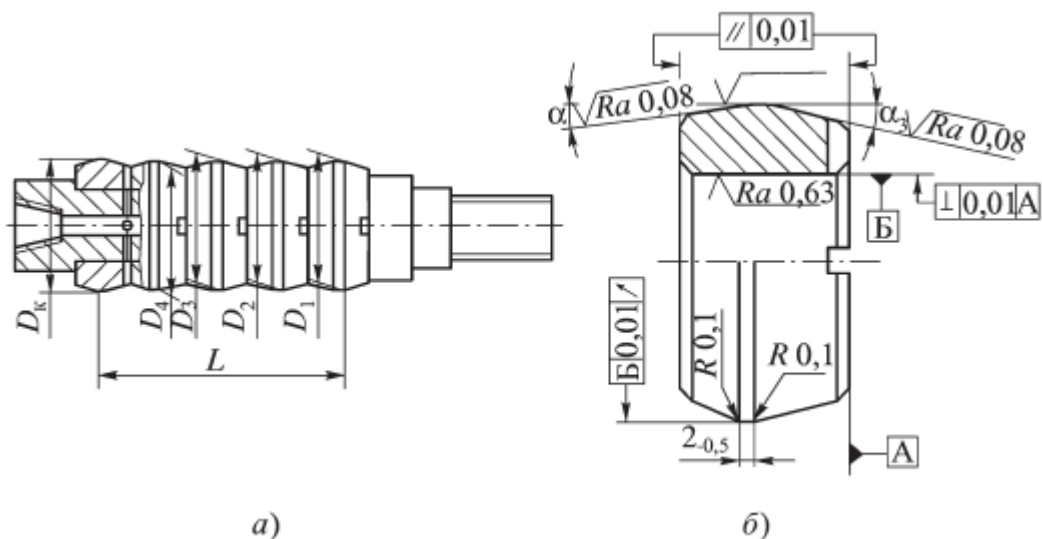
Multi-flute mandrel for deep hole machining:
